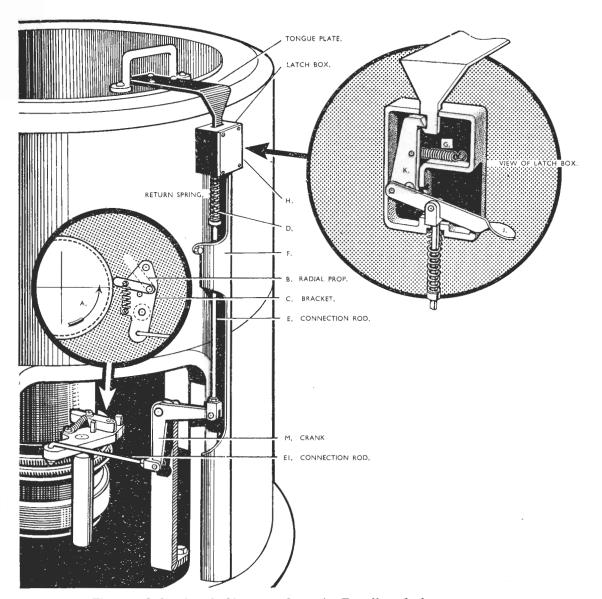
Safety interlocking gear for 30-in. Broadbent hydro extractor.
